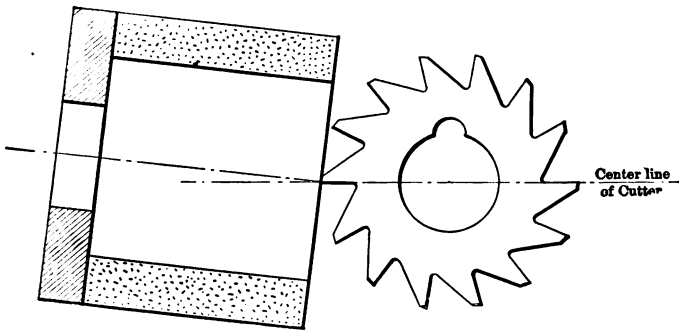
Cup Wheel Inclined to the Angle of Clearance of Cutter
